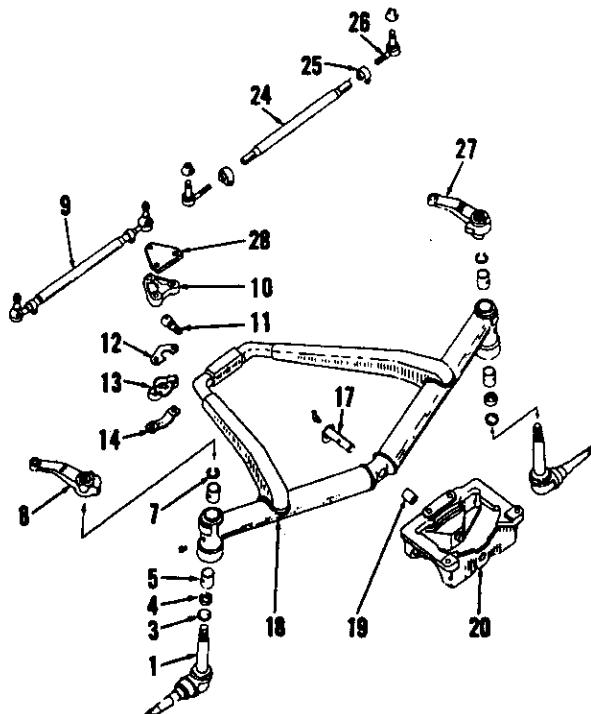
Exploded view of Series 424, 444, 2424 and 2444 heavy duty non-adjustable front axle and component parts.
